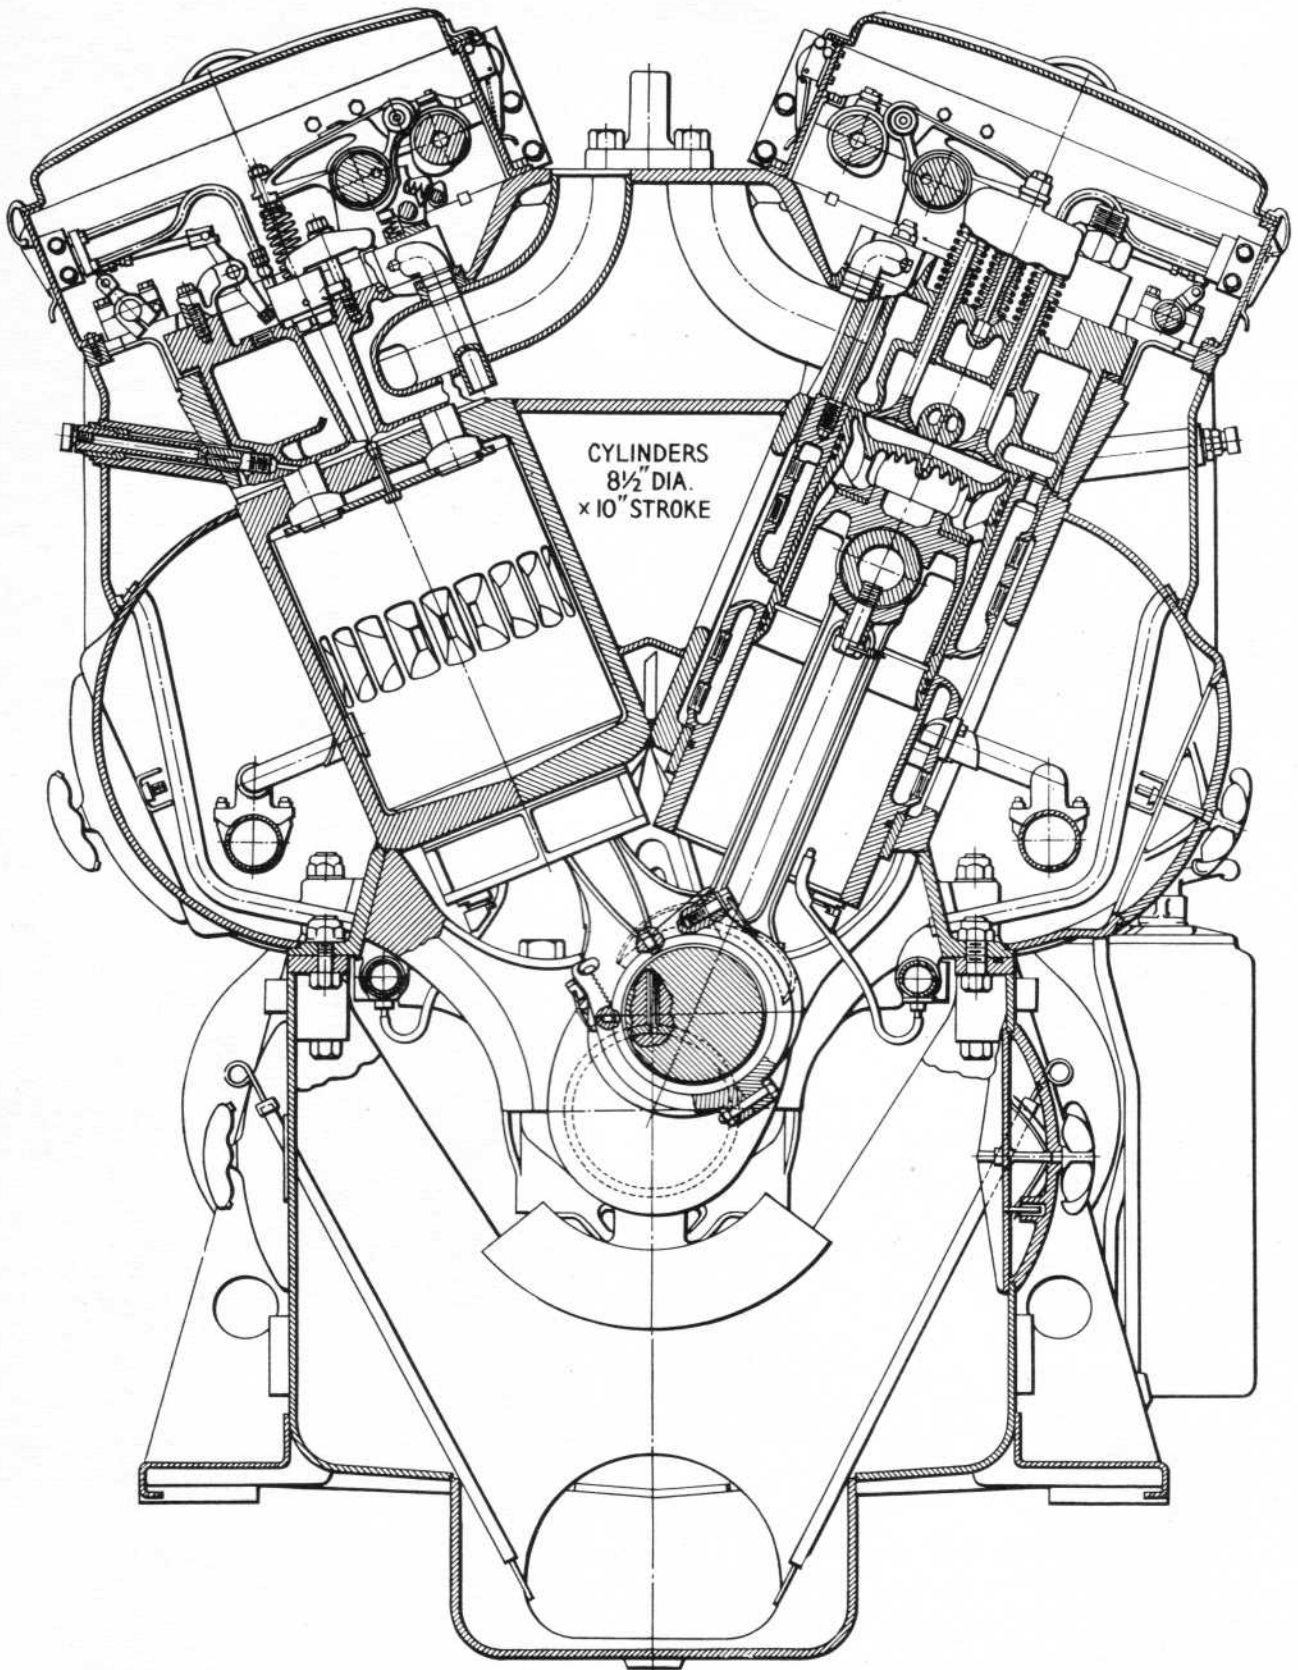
Cross section of 567-C two-stroke railway oil engine as built on production-line methods by the Electro-Motive Division of General Motors at the La Grange works. Output per cylinder is about 120 b.h.p. at a speed of 800 to 835 r.p.m. The special liner construction is to keep cooling water away from the welds in the steel framing. Engine weight is borne through the welded steel oil pan or engine base
